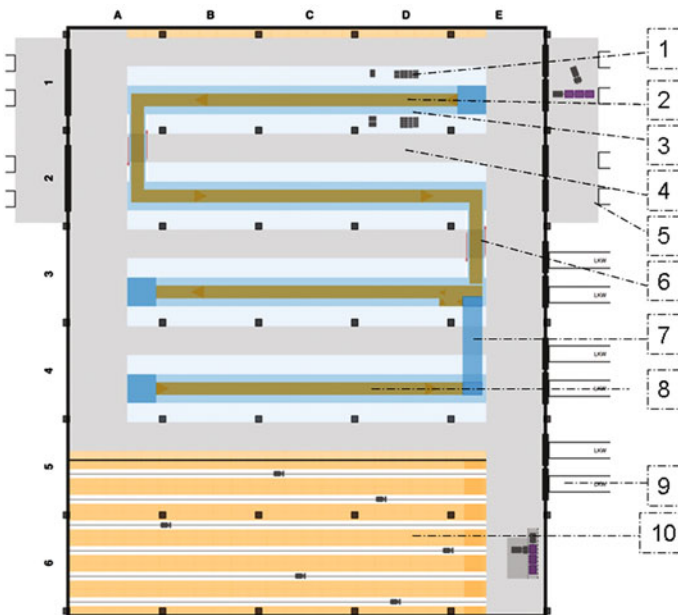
Layout of assembly with adjacent warehouse (exemplary sketch). Legend: 1 Material supply zone, 2 assembly line, 3 working area 4 drive way for internal transport and for escape route, 5 loading docks, 6 floor transfer of assembly line, 7 overhead transfer of assembly line, 8 preassembly line, 9 loading docks for just in time (JIT) supply, 10 conventional warehouse for assembly material
